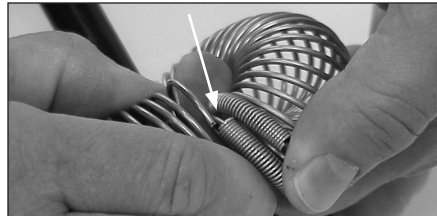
Insert end of Corona Ring into Inner Spring.
